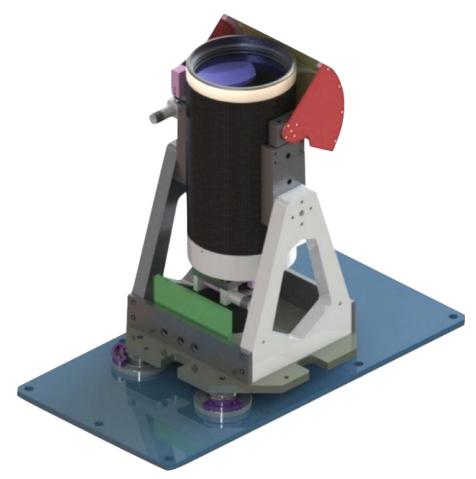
Assembled view of the LPC opto-mechanical concept; the cover has been removed to show the inner components.
